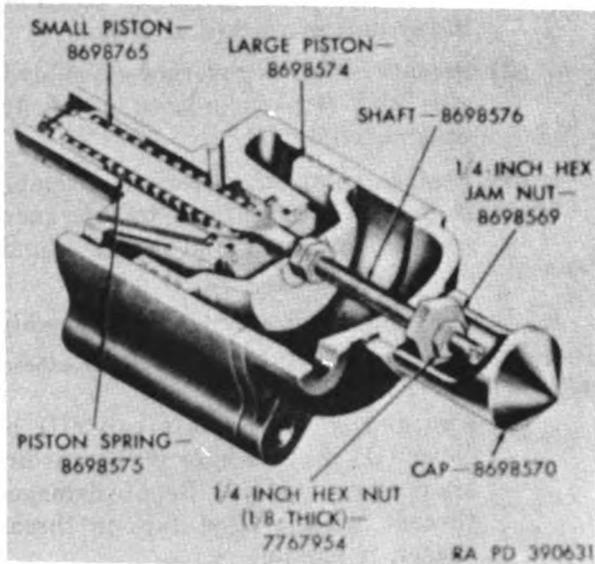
Fuel injector oil booster pump assembly—cutaway view.
